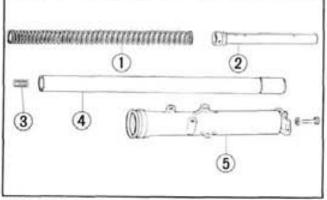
(i) Front suspension (2) Bottom pipe (3) Front rebound spring
